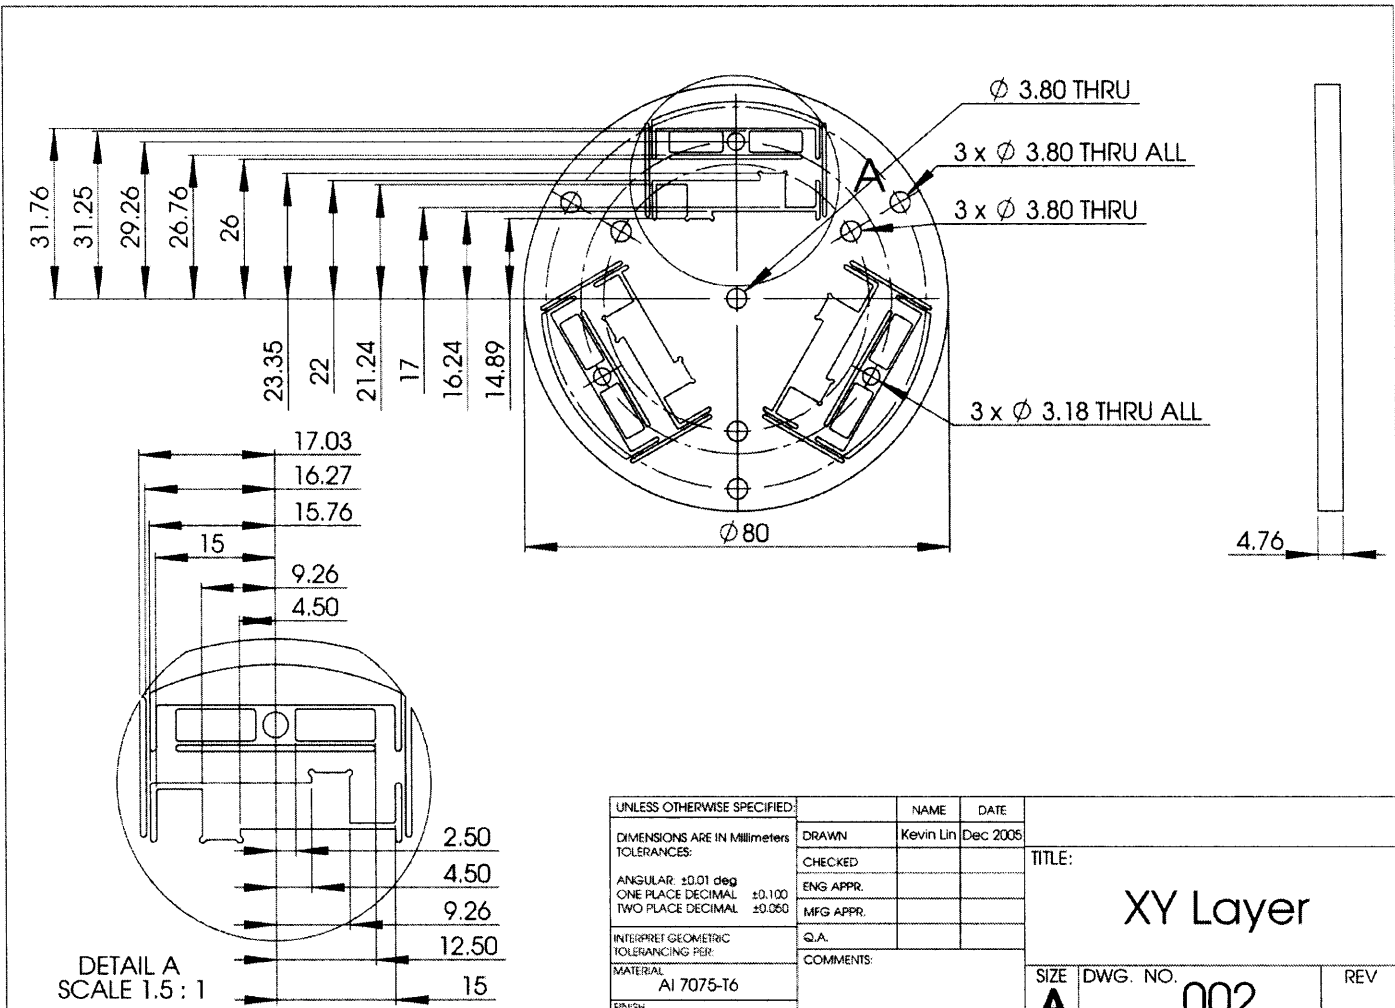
Engineering drawing of out-of-plane motion component layer.
